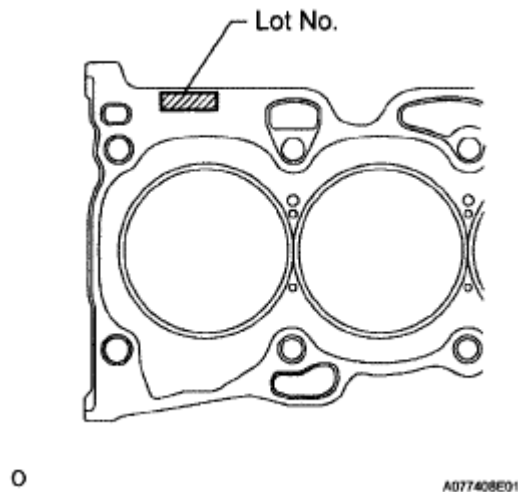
Identifying Cylinder Block Surface With Lot Number
